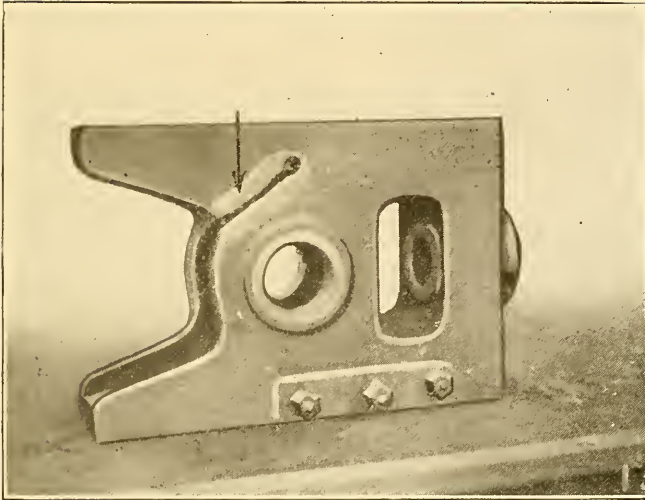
Fracture in Crosshead Cut Out for Welding.
